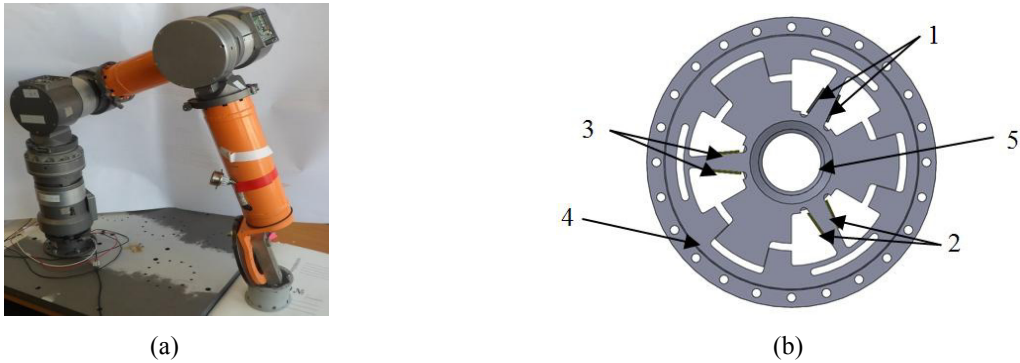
(a) – two degree of freedom robot manipulator with torque sensors in the joints; (b) – uni-axial torque sensor: 1-3 – strain gauge pairs forming half-bridges, 4 – outer ring, 5 – inner ring.
